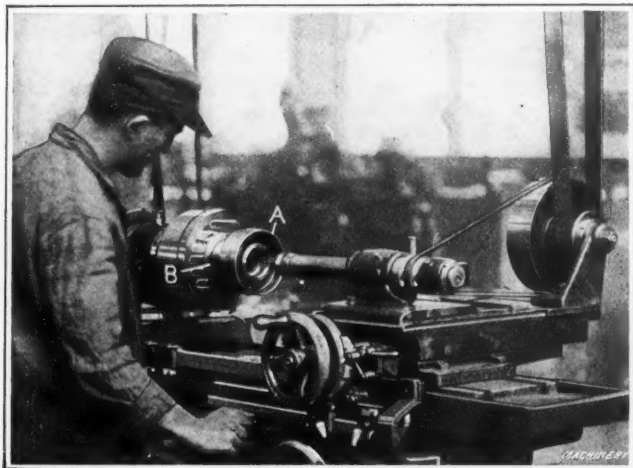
Method of using Heald Rotary Magnetic Chuck for holding Work for Internal Grinding
